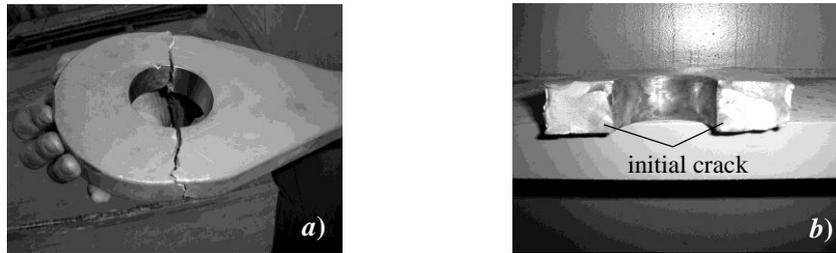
Fatigue breakage of testing bar (a) and example of fracture surface (b)
